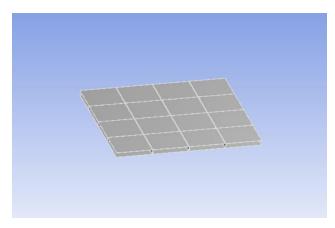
Geometry of aluminium stiffened sandwich plate having rectangular stiffeners
